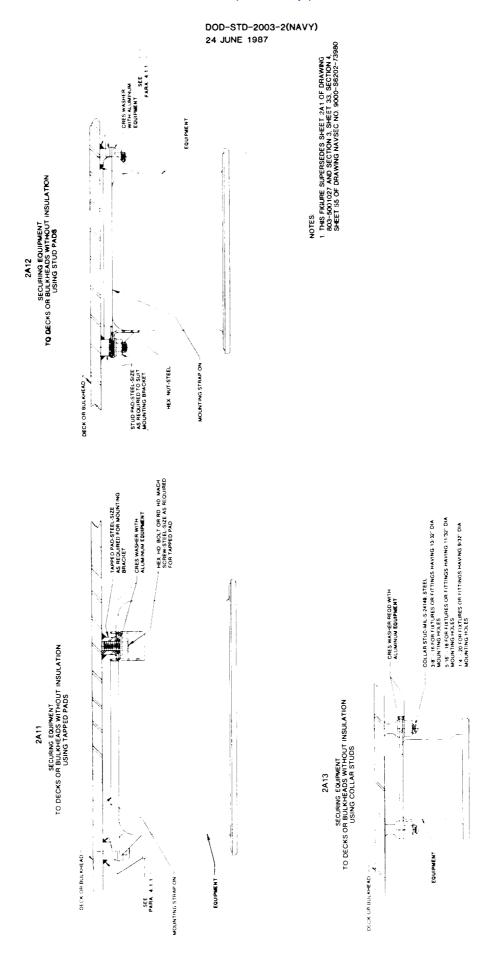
A1. Equipment secured to watertight steel decks of bulkheads.
